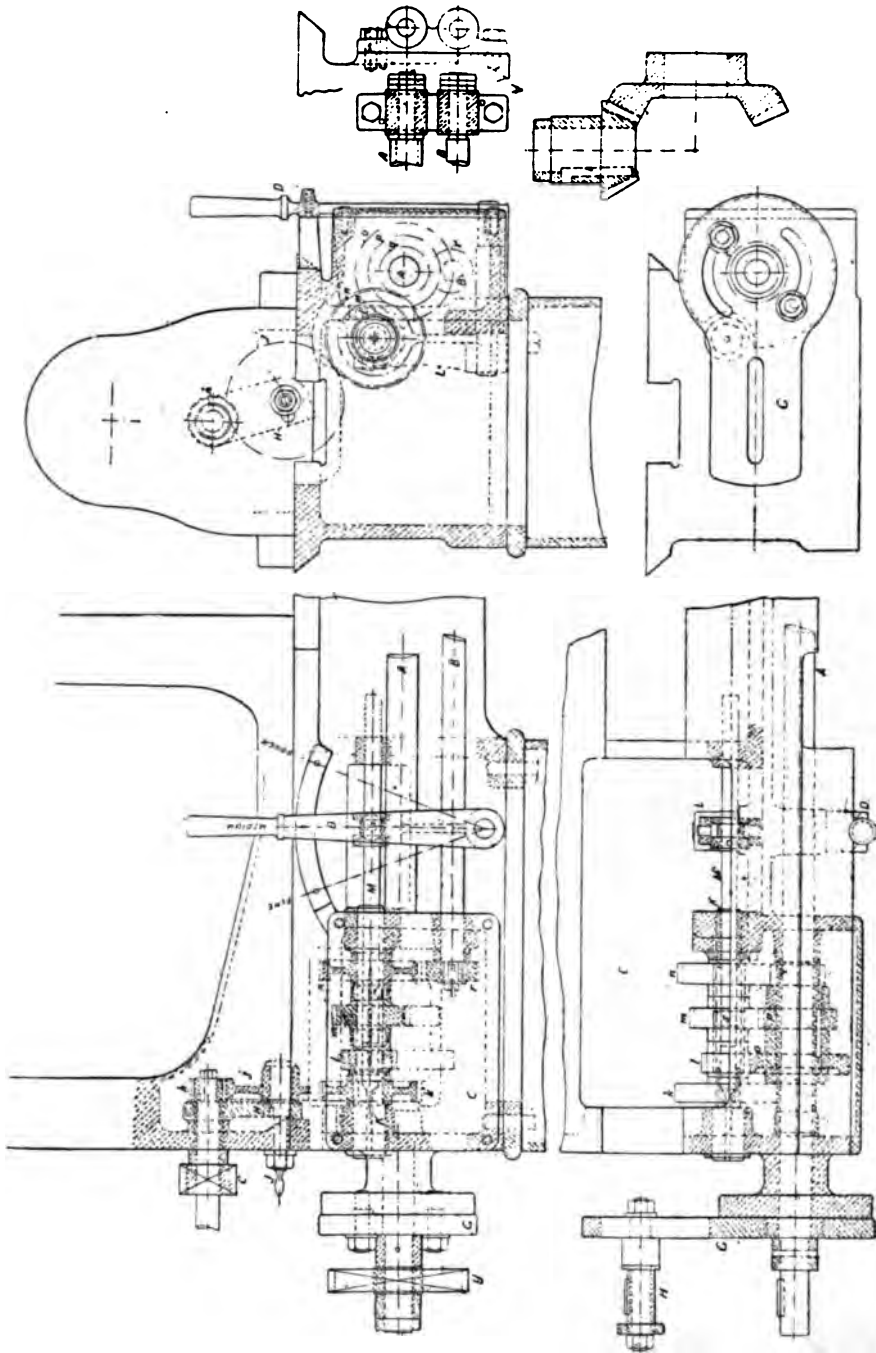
Screw-Cutting Lathe. (Change-speed Gears, &c.)
